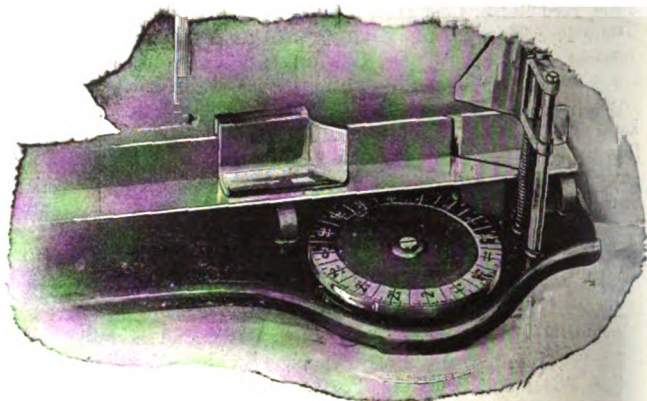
ENLARGED VIEW OF PRINCIPAL WORKING PARTS.
